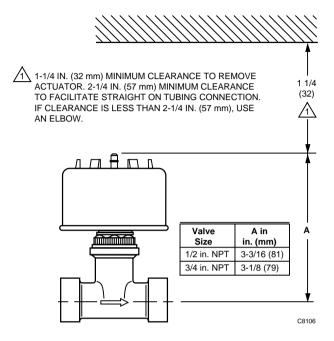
Rough in Dimensions for MP958A actuator with V5852Axx Valve Body.
